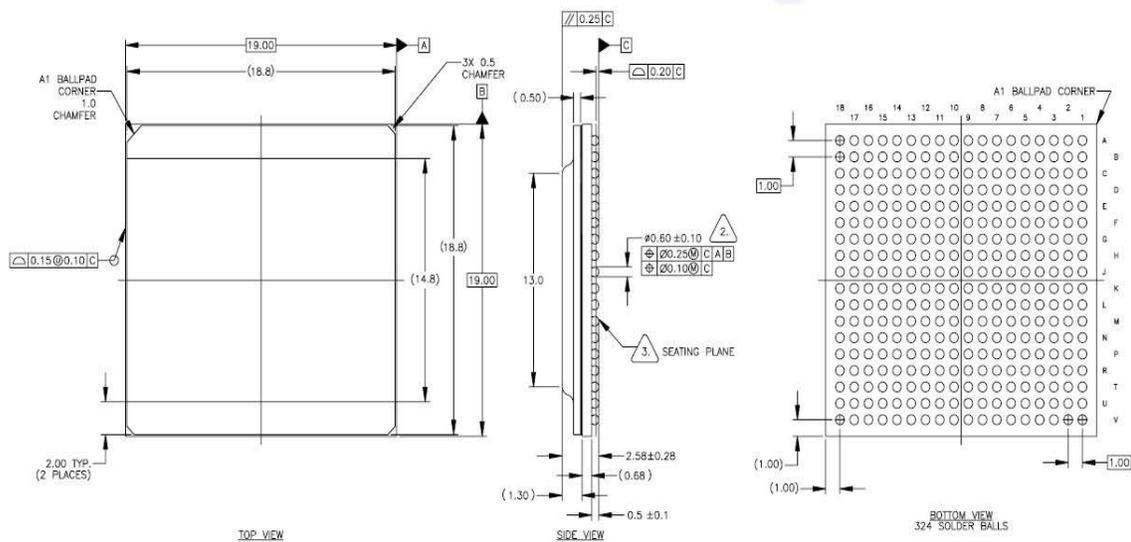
X557-AT/X557-AT2 Package Drawing
